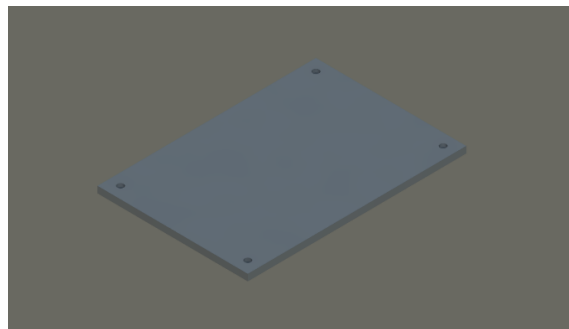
Isometric view of rectangular box sensor (Top Plate)
